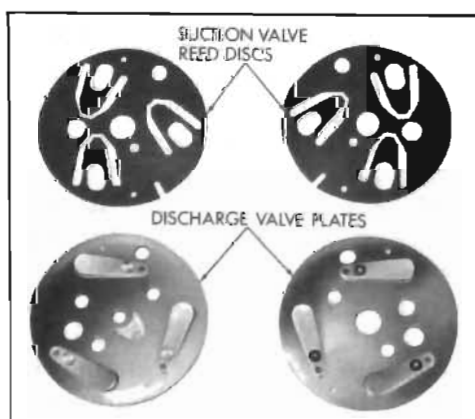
Compressor Suction Valve Reed Discs and Discharge Valve Plates
